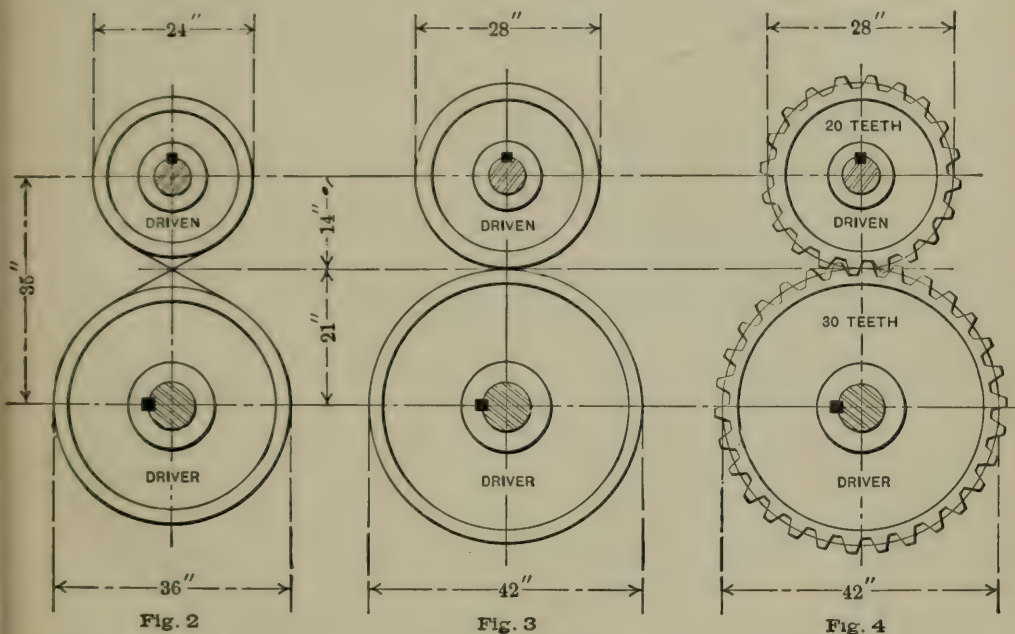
Shafts connected by Pulleys and Crossed Belt. FIG. 3. — Shafts connected by Friction Rolls. FIG. 4. — Shafts connected by Gears.
